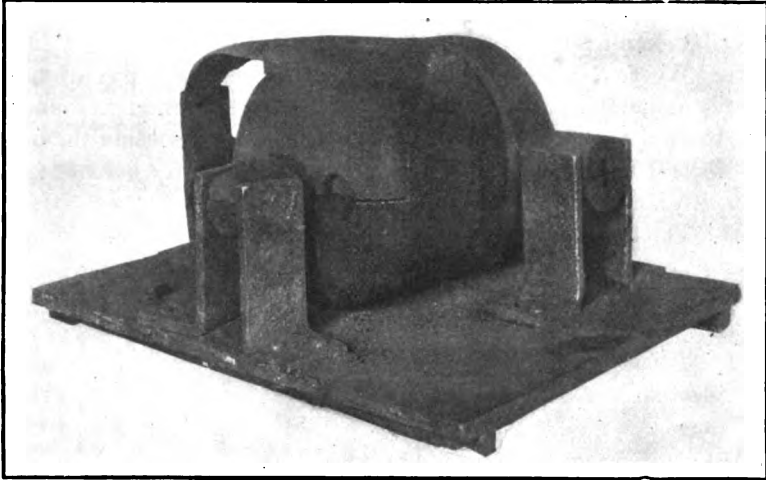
PASTING JIG SHOWING COMPLETED CORE IN PLACE
